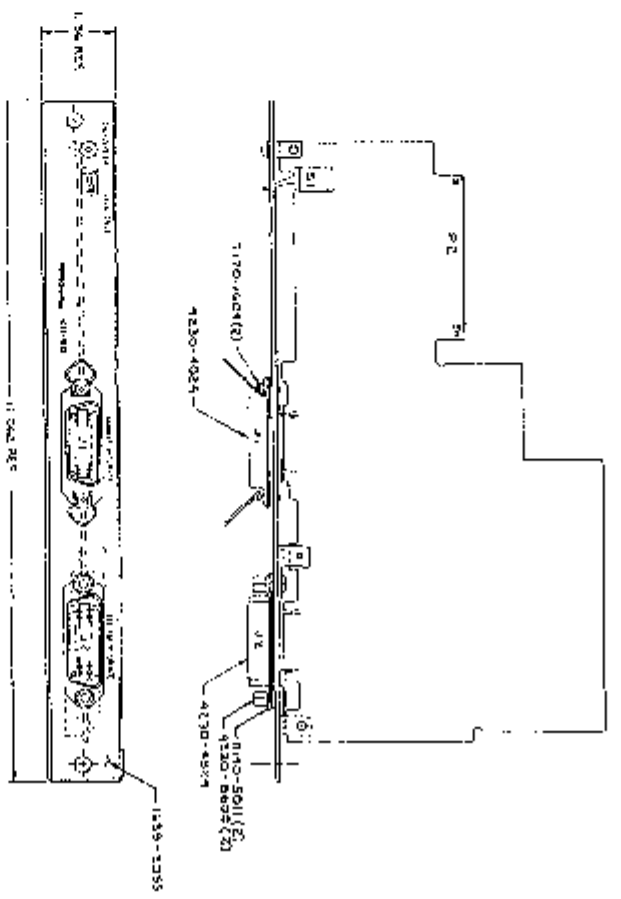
High-Speed Interface Board, Section 2, 1386-1720
